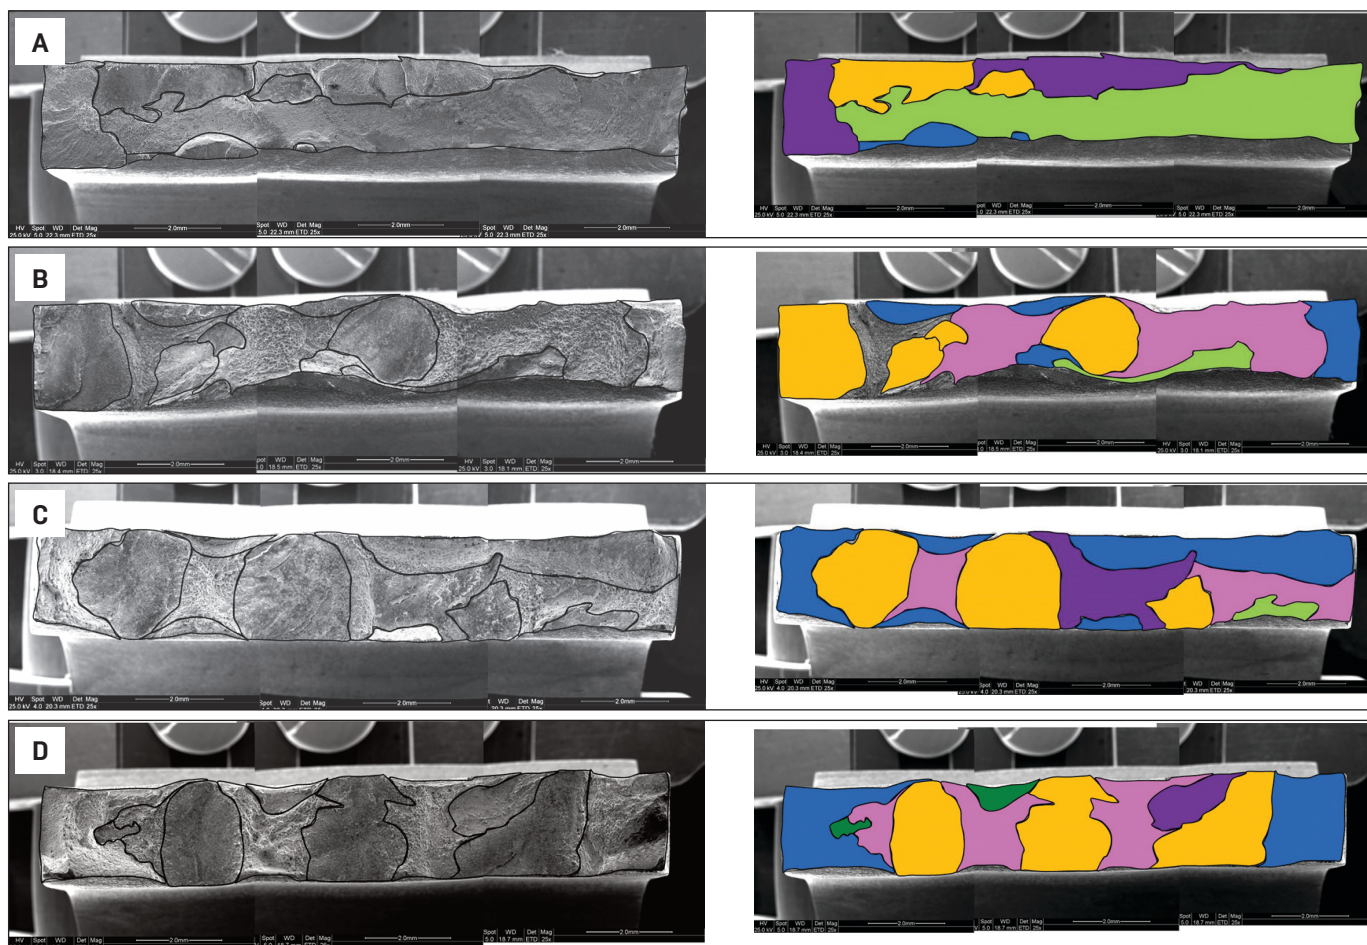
The fracture surface of different samples on the Ni-alloy 625 side and the different typical morphologies are represented by different colors: A — As-welded; B — 640°C/6 h; C — 660°C/10 h; D — 660°C/20; Light green = microvoid coalescence in weld metal by overload; purple = quasi-cleavage in the CGHAZ; orange = fusion boundary fracture; pink = microvoid coalescence in the base metal; dark green = quasi-cleavage, cleavage, or terrace fracture in the PGZ; blue = overload fracture in the base metal.
